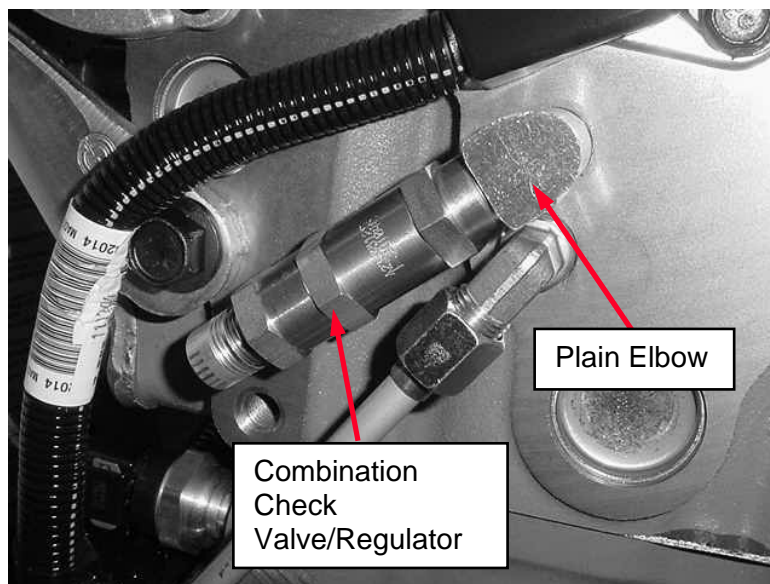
New Combination Pressure Regulator/Check Valve & Plain Elbow
